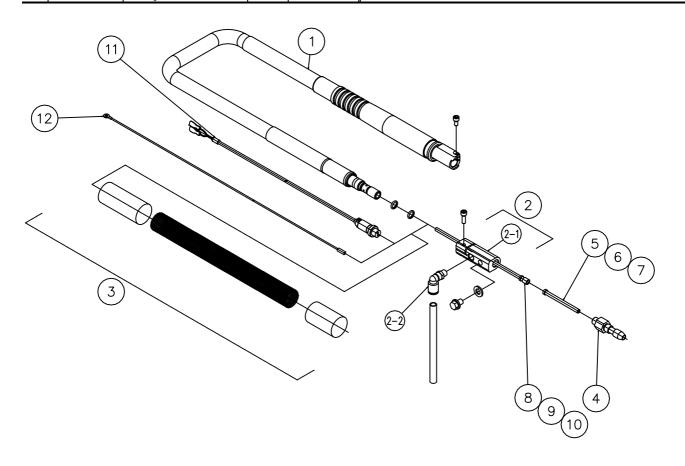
Exploded diagram for the coaxial power cable (For B6 type manipulator [DL power supply, M350L or P500L])
